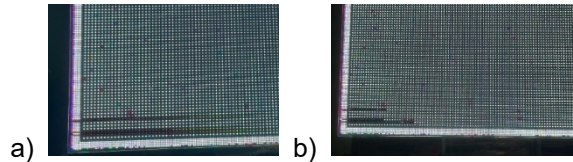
The horizontal line defect: a) before laser cut, b) after laser cut
